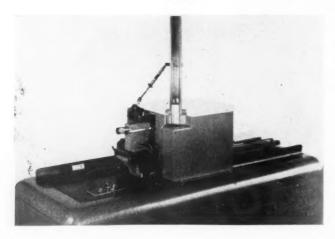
Gaging production can be increased by stacking the pieces to be gaged up in a chute in the manner shown in this illustration.
